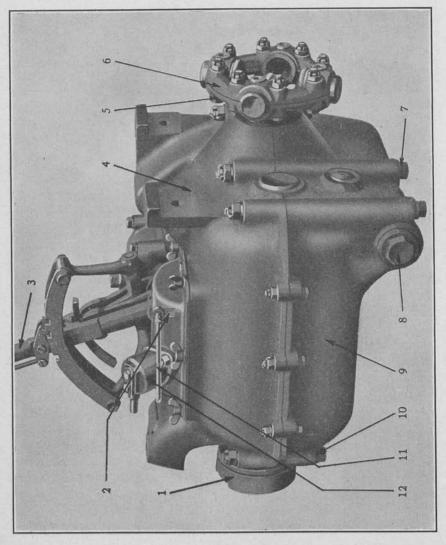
LEFT SIDE OF TRANSMISSION	Name	Transmission universal joint ring.	Tire pump frame.	Change gear lever.	Fransmission case, upper half.	Universal joint toggle.	Drive shaft trunnion, front.	Fransmission case bolt.	Drain plug.	Fransmission case, lower half.	Transmission case bolt.	Air pump engaging rod.	Air pump cylinder.
